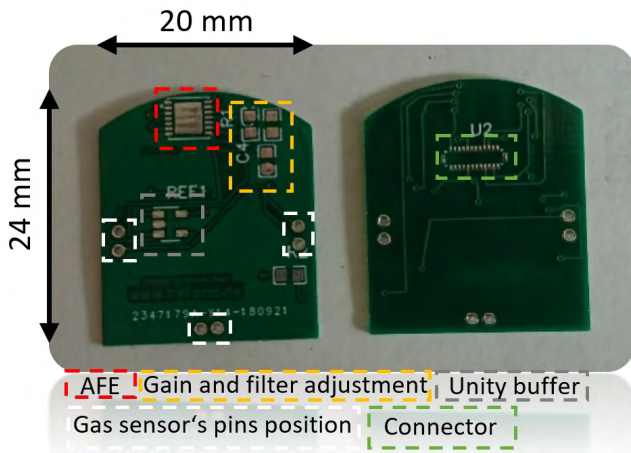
Printed circuit board(PCB) design of gas sensor driver.
